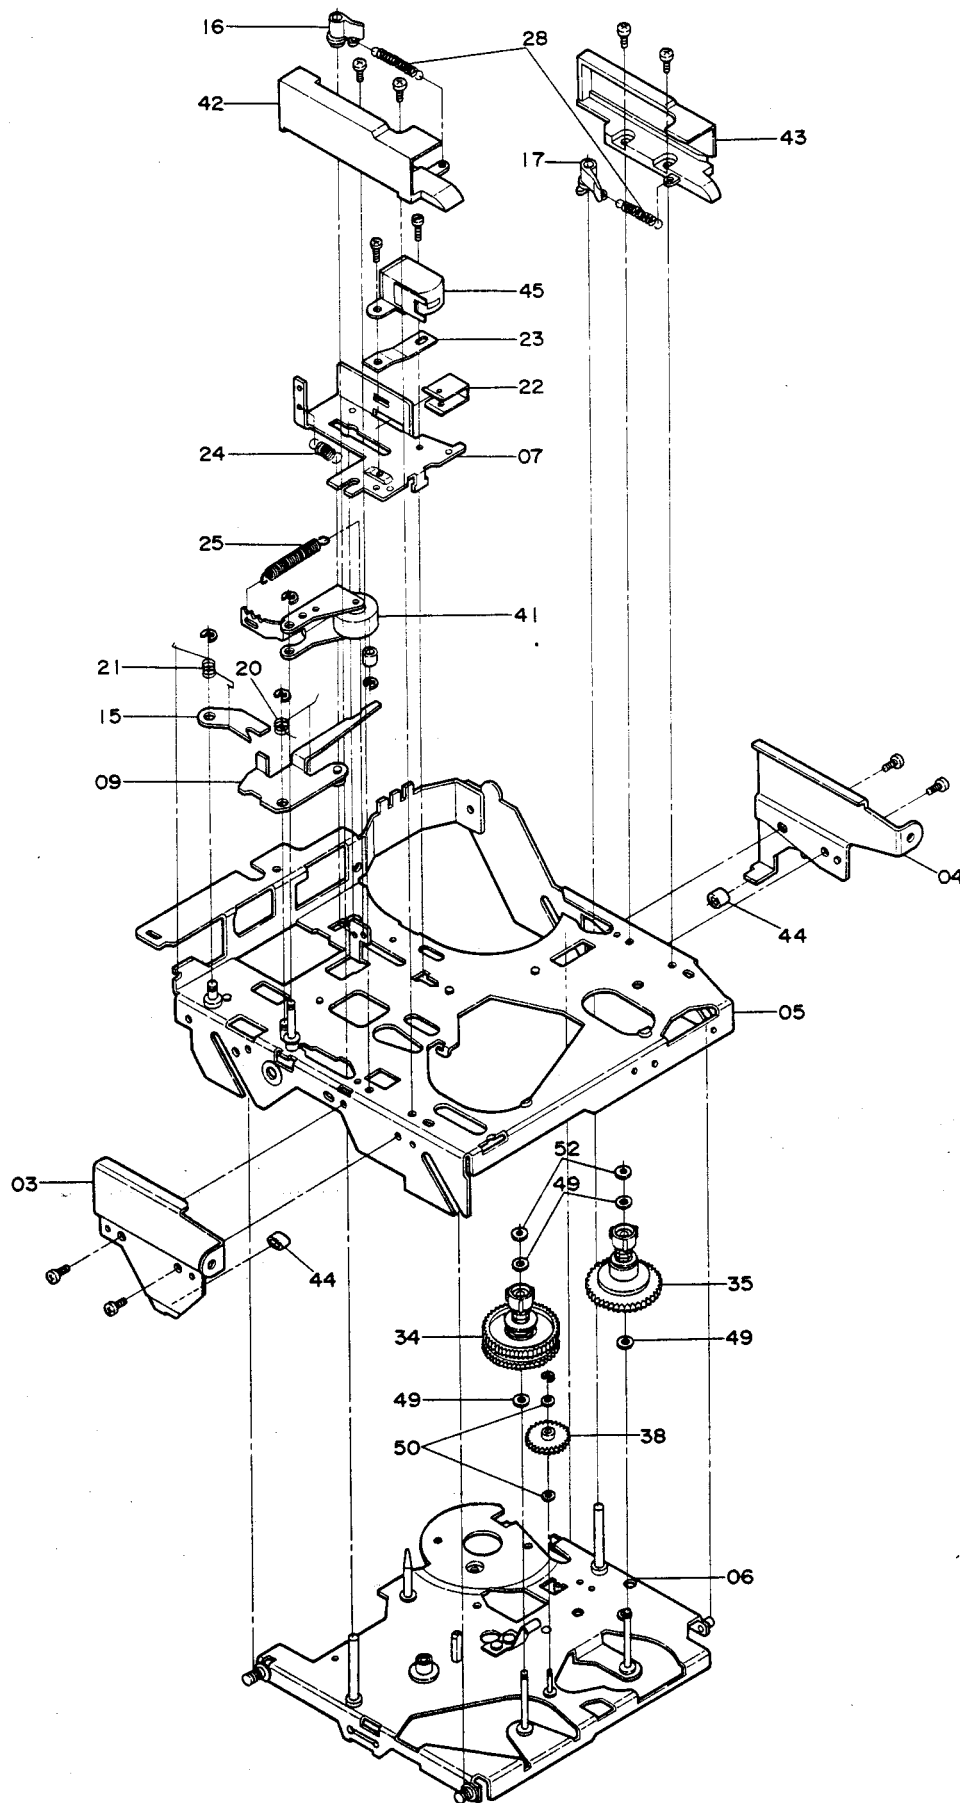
MECHANISM EXPLODED VIEW (UPPER SIDE)
